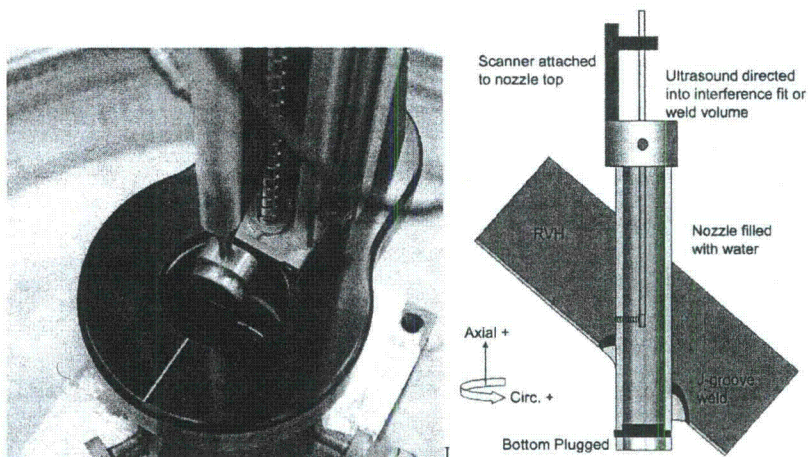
Left: Scanner on Calibration Specimen. Right: Inspection Schematic
